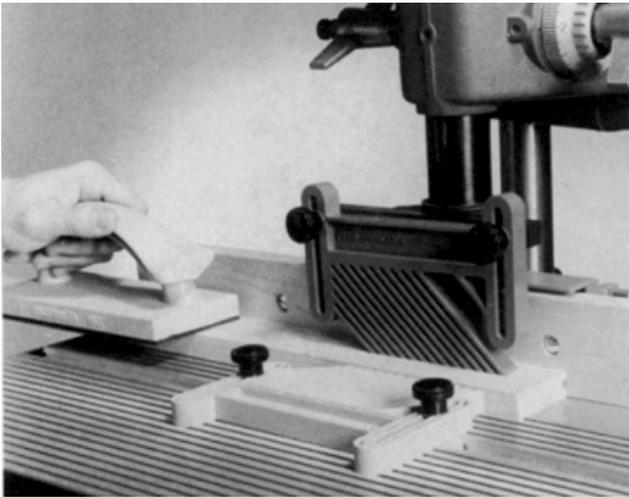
Using a 1/4" blank cutter to form a groove exactly centered in the edge of the stock.
